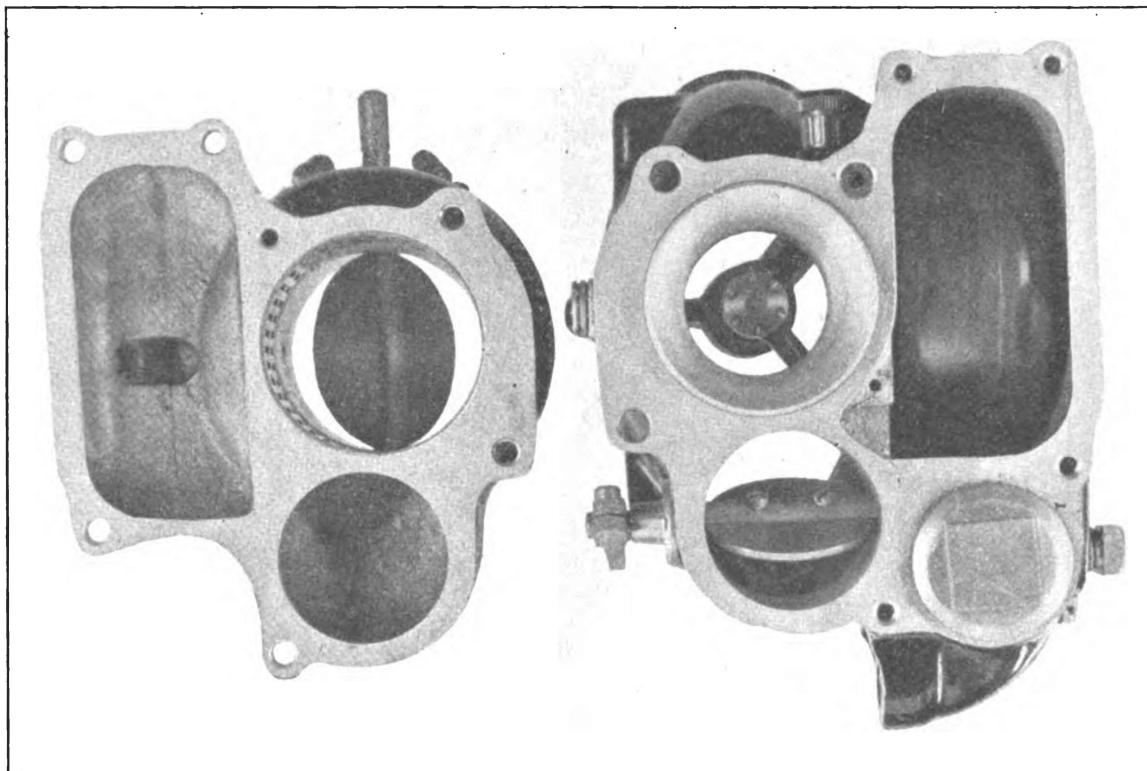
Stromberg NA-S6 carburetor. Sectional view.
